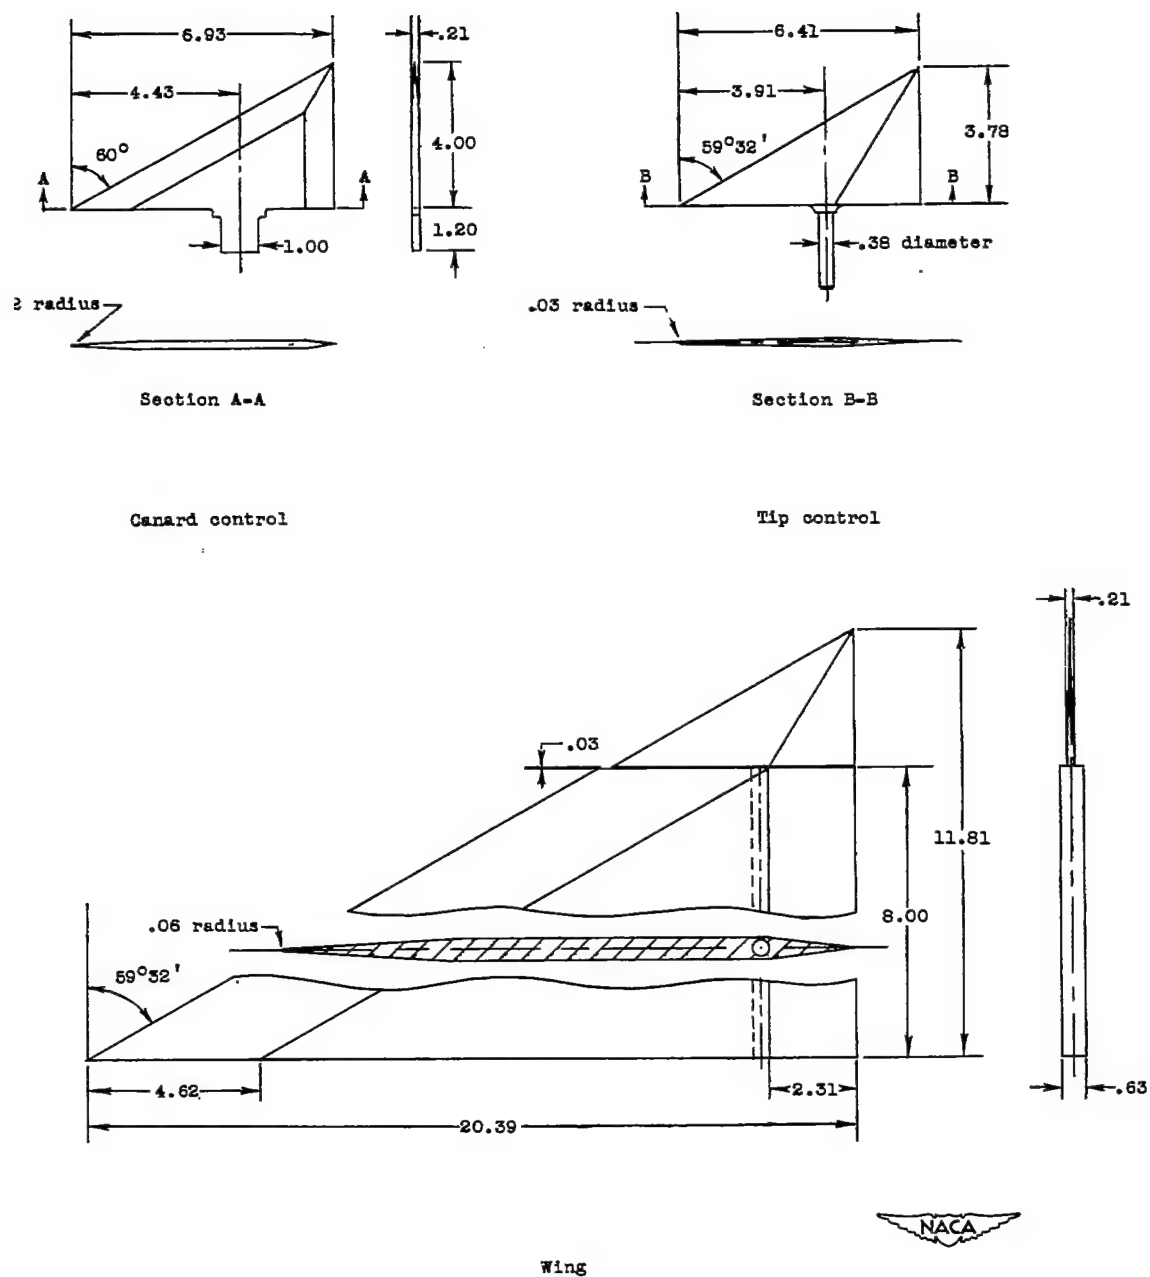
Detail of wing and control surfaces. All dimensions are in inches.
